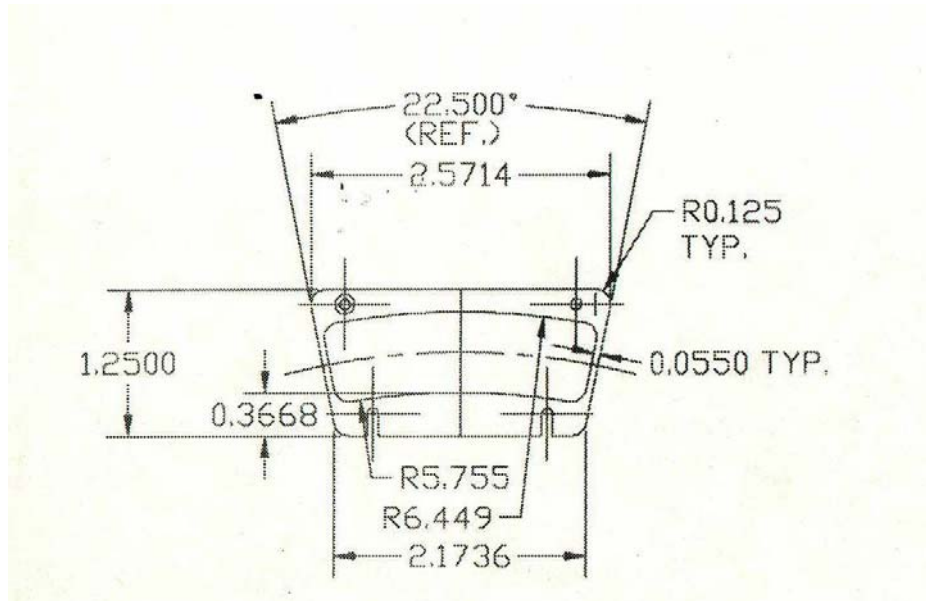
A machine drawing of the target frame for the new large diameter ($r=155$ mm) target wheel (units are inches).
